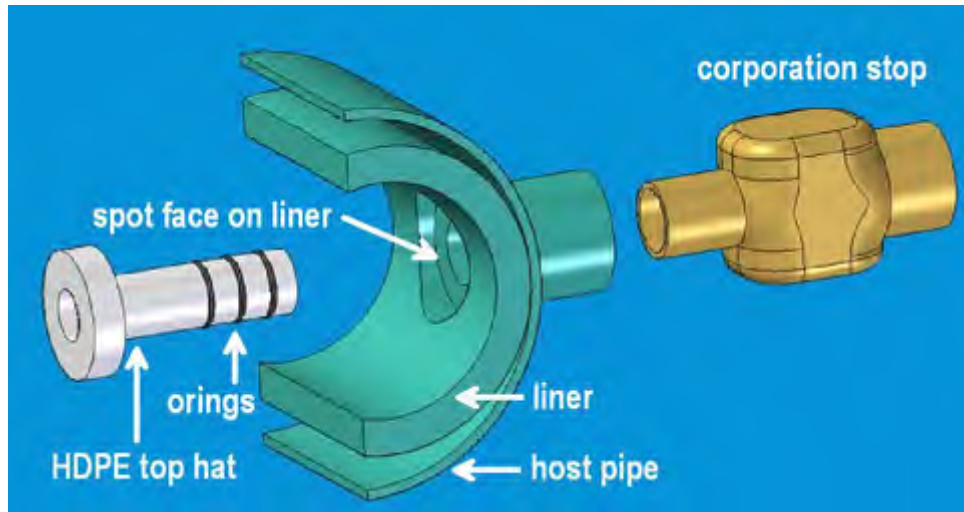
Exploded view of the top hat lateral sealing technique.
